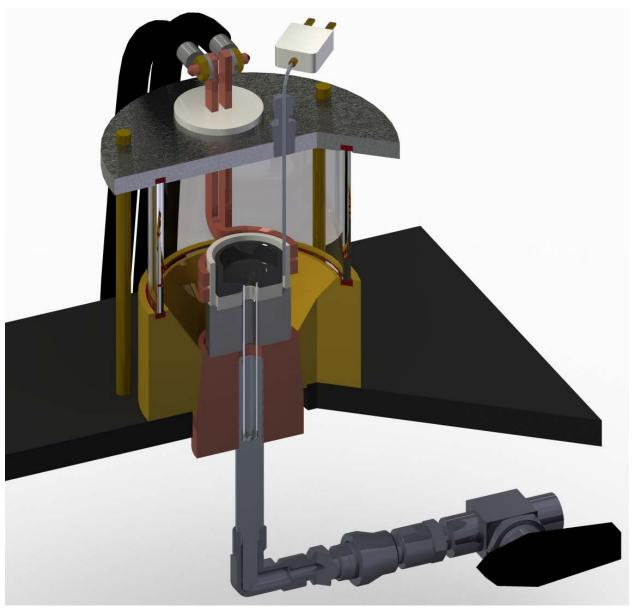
Cut away conceptual model of the improved laboratory scale casting furnace.
